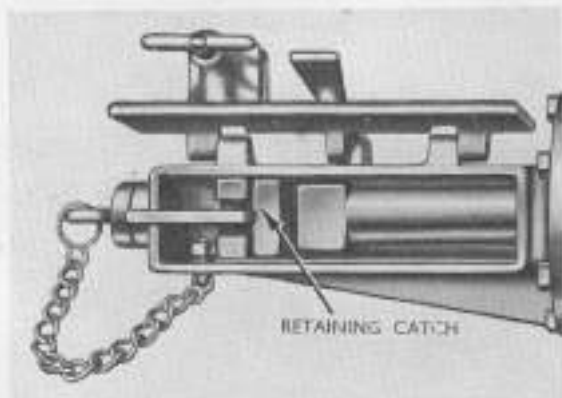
Trailer Brake Cable Connector Box with Retaining Catch in Lock Position.
